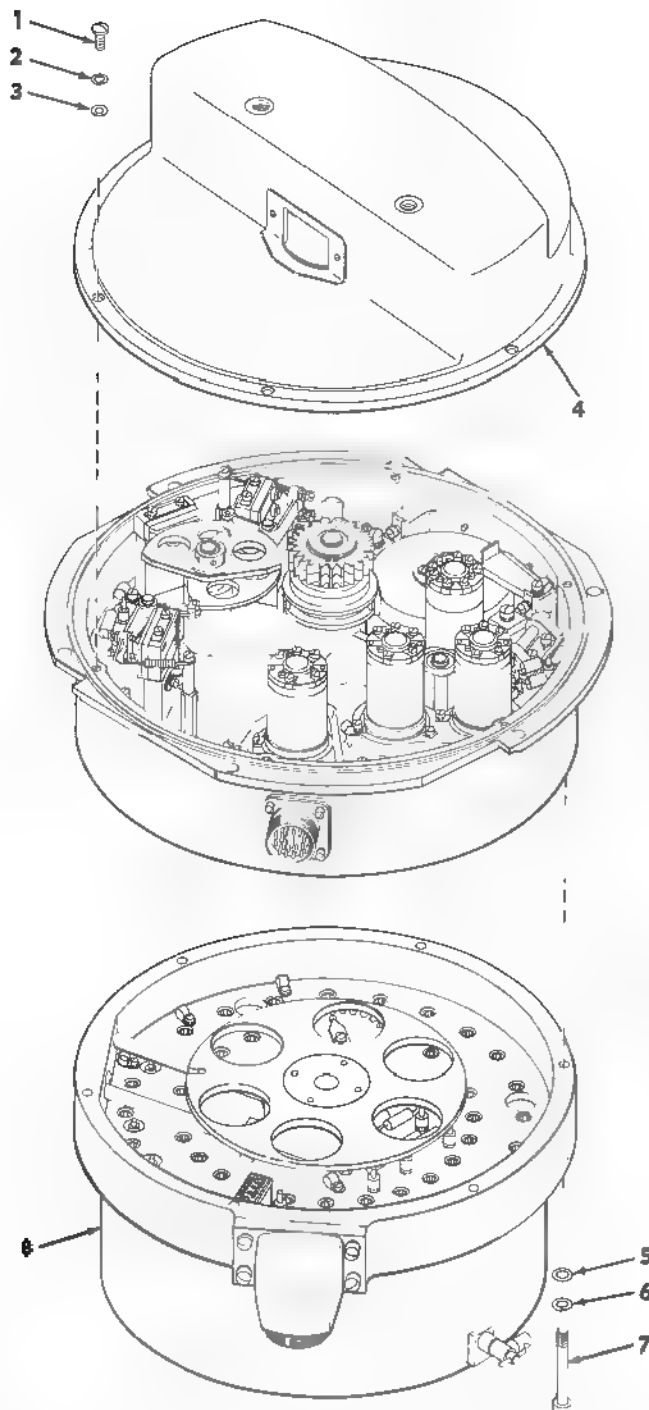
DIAL /8171842/ AND DIAL, SCALE ASSEMBLY /8171843/ EXPLODED VIEW
